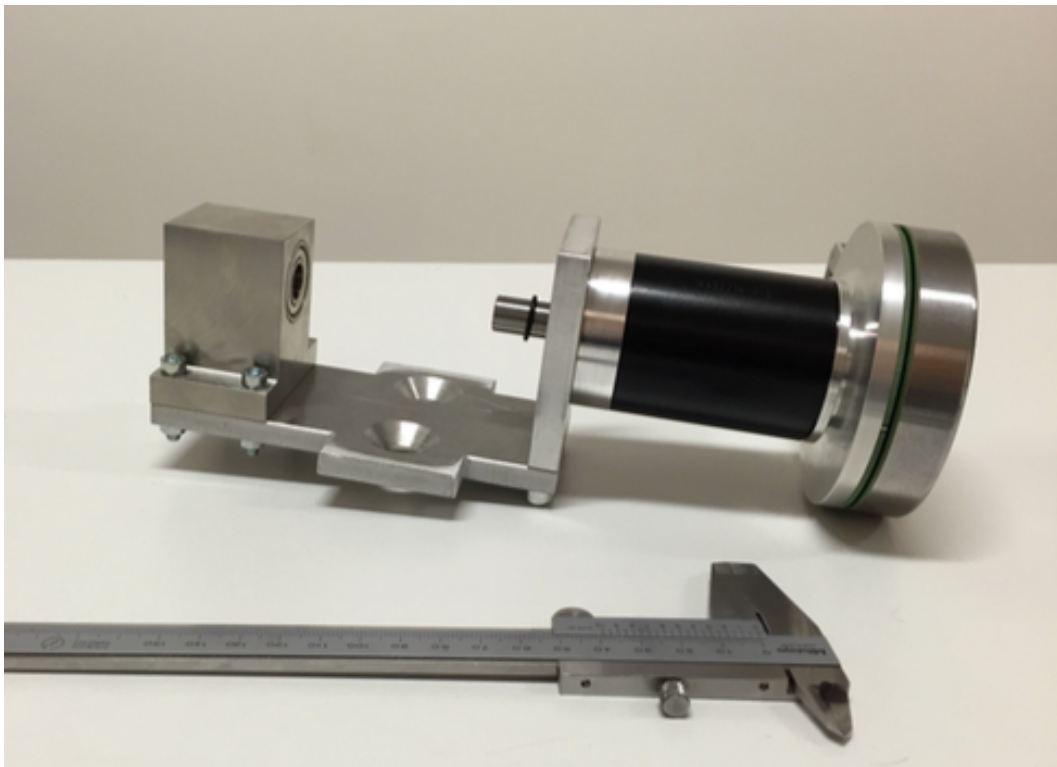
Joint 3* assembly, motor installed. The silver component is the dual bearings shaft holder
